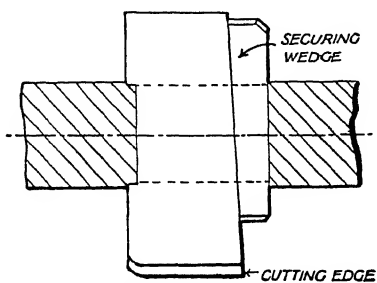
Single-ended Self-centring Cutter secured with Wedge. Longitudinal Sectional Elevation.
